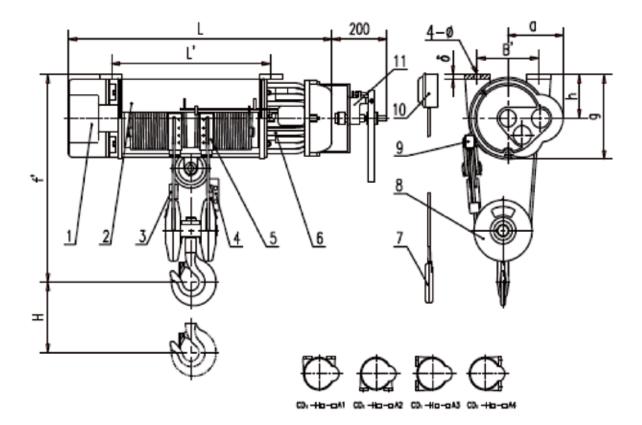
Outline Structure Drawing for PWMDF3T24M – PWMDF5T24M Fixed hoist
